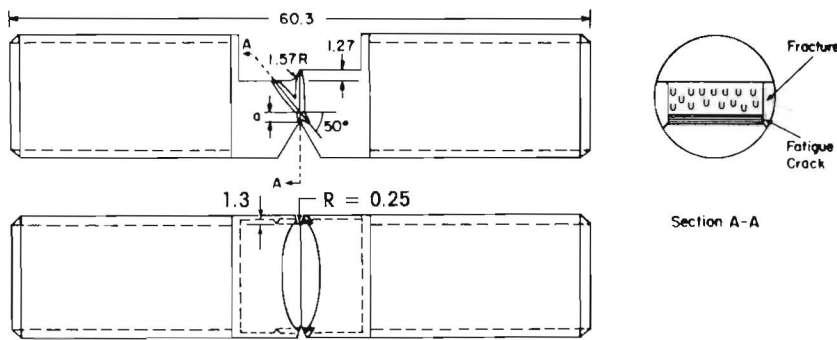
Second machining (after fatigue precracking) for the asymmetric specimens; a is the fatigue crack.
